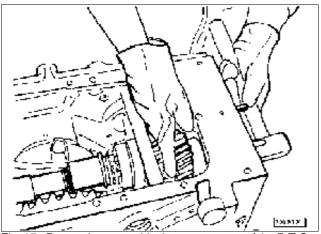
Proceed to assemble the components of the P.T.O. final reduction unit (540 - 1000 rev/min). Locate the shaft connecting the P.T.O. clutch to the final reduction, complete with the STANDARD/ECONOMY selector sleeve.
